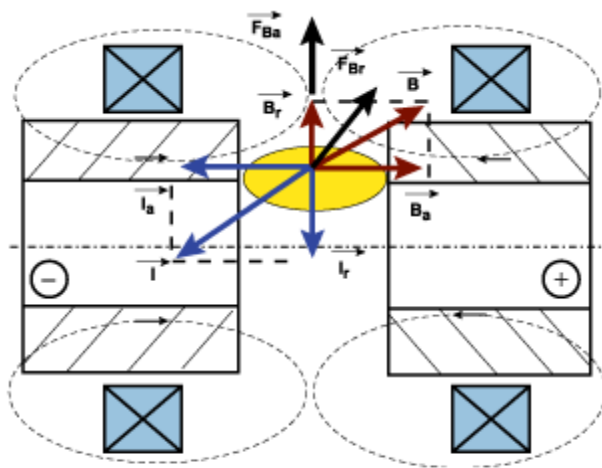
Schematic Representation of MIAB welding. [12]
